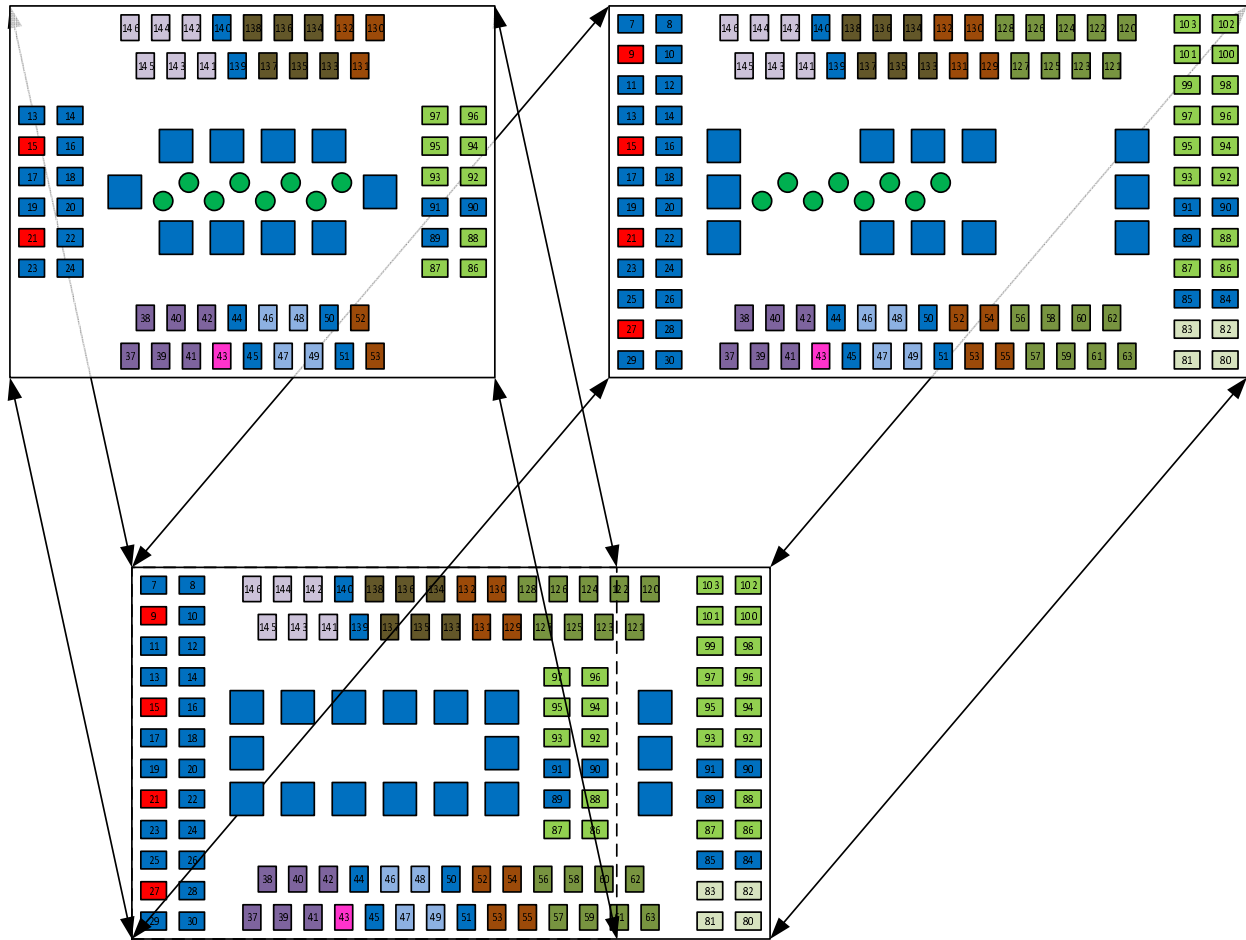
Minimal SMT1915 and SMT2515 Common PCB Pad Layout
